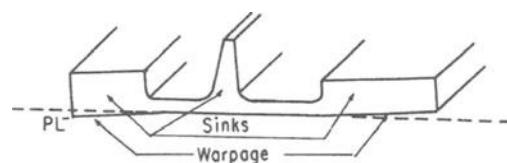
Avoid having uneven sections, which cause distortion, warpage, cracks, sinks, and strains because of differences in shrinkage from one section to another. When this situation exists, the problem is normally eliminated by changing the process controls, which in turn usually requires a longer cycle time.
